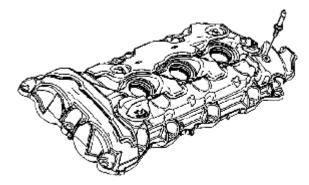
Identifying Left Camshaft Cover Gasket Courtesy of SUZUKI OF AMERICA CORP.
